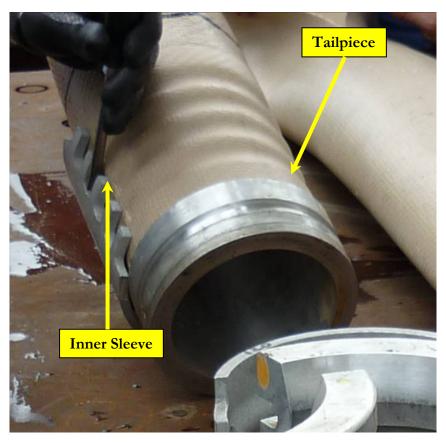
Tailpiece Inserted in Hose and Inner Sleeve Being Installed
